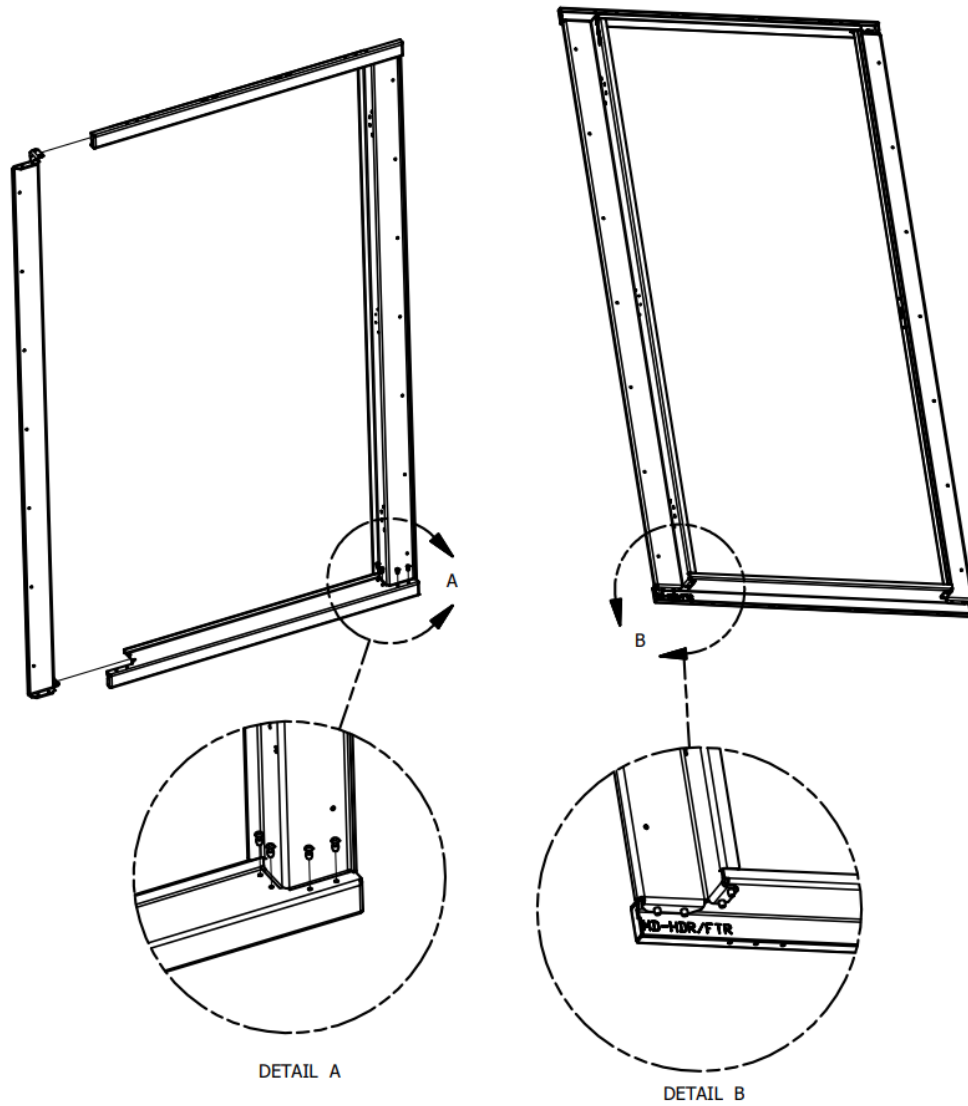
Fastening sides to header/footer - TYP. 4 corners
